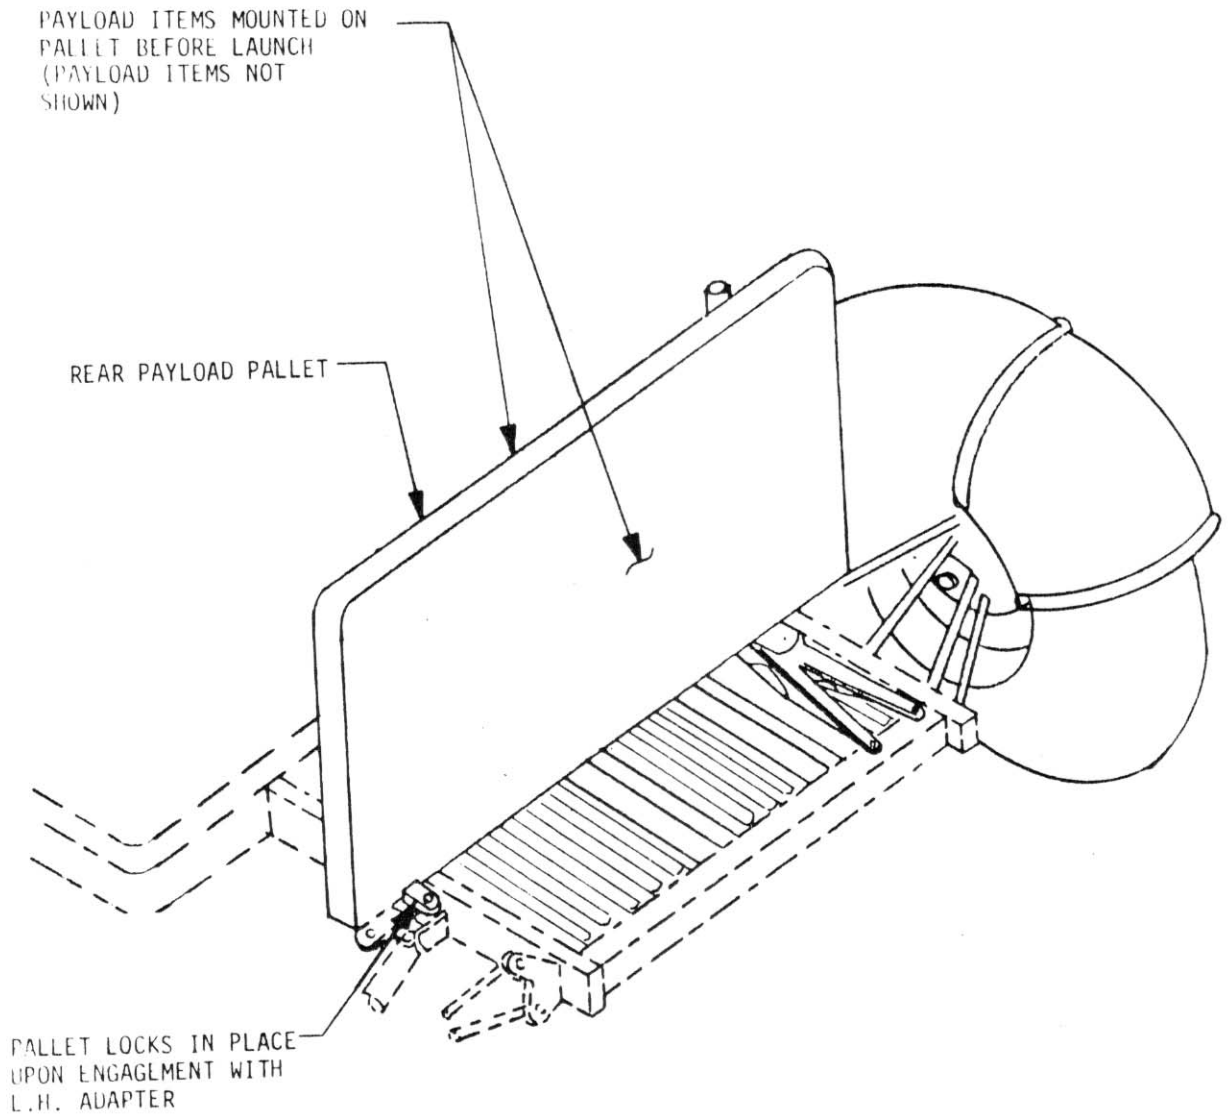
REAR PAYLOAD PALLET INSTALLED
